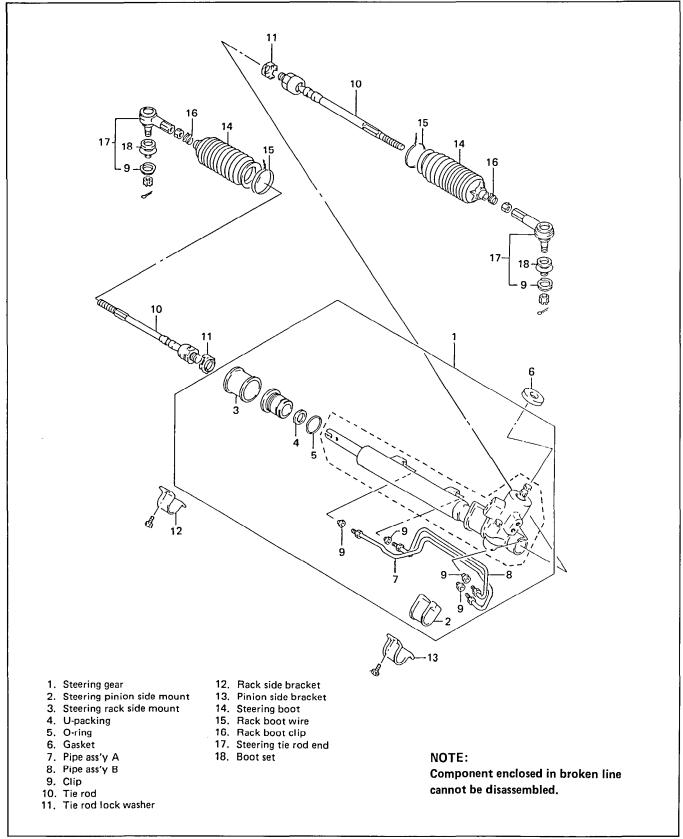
B1-34 Exploded View of Power Steering Gear Box
